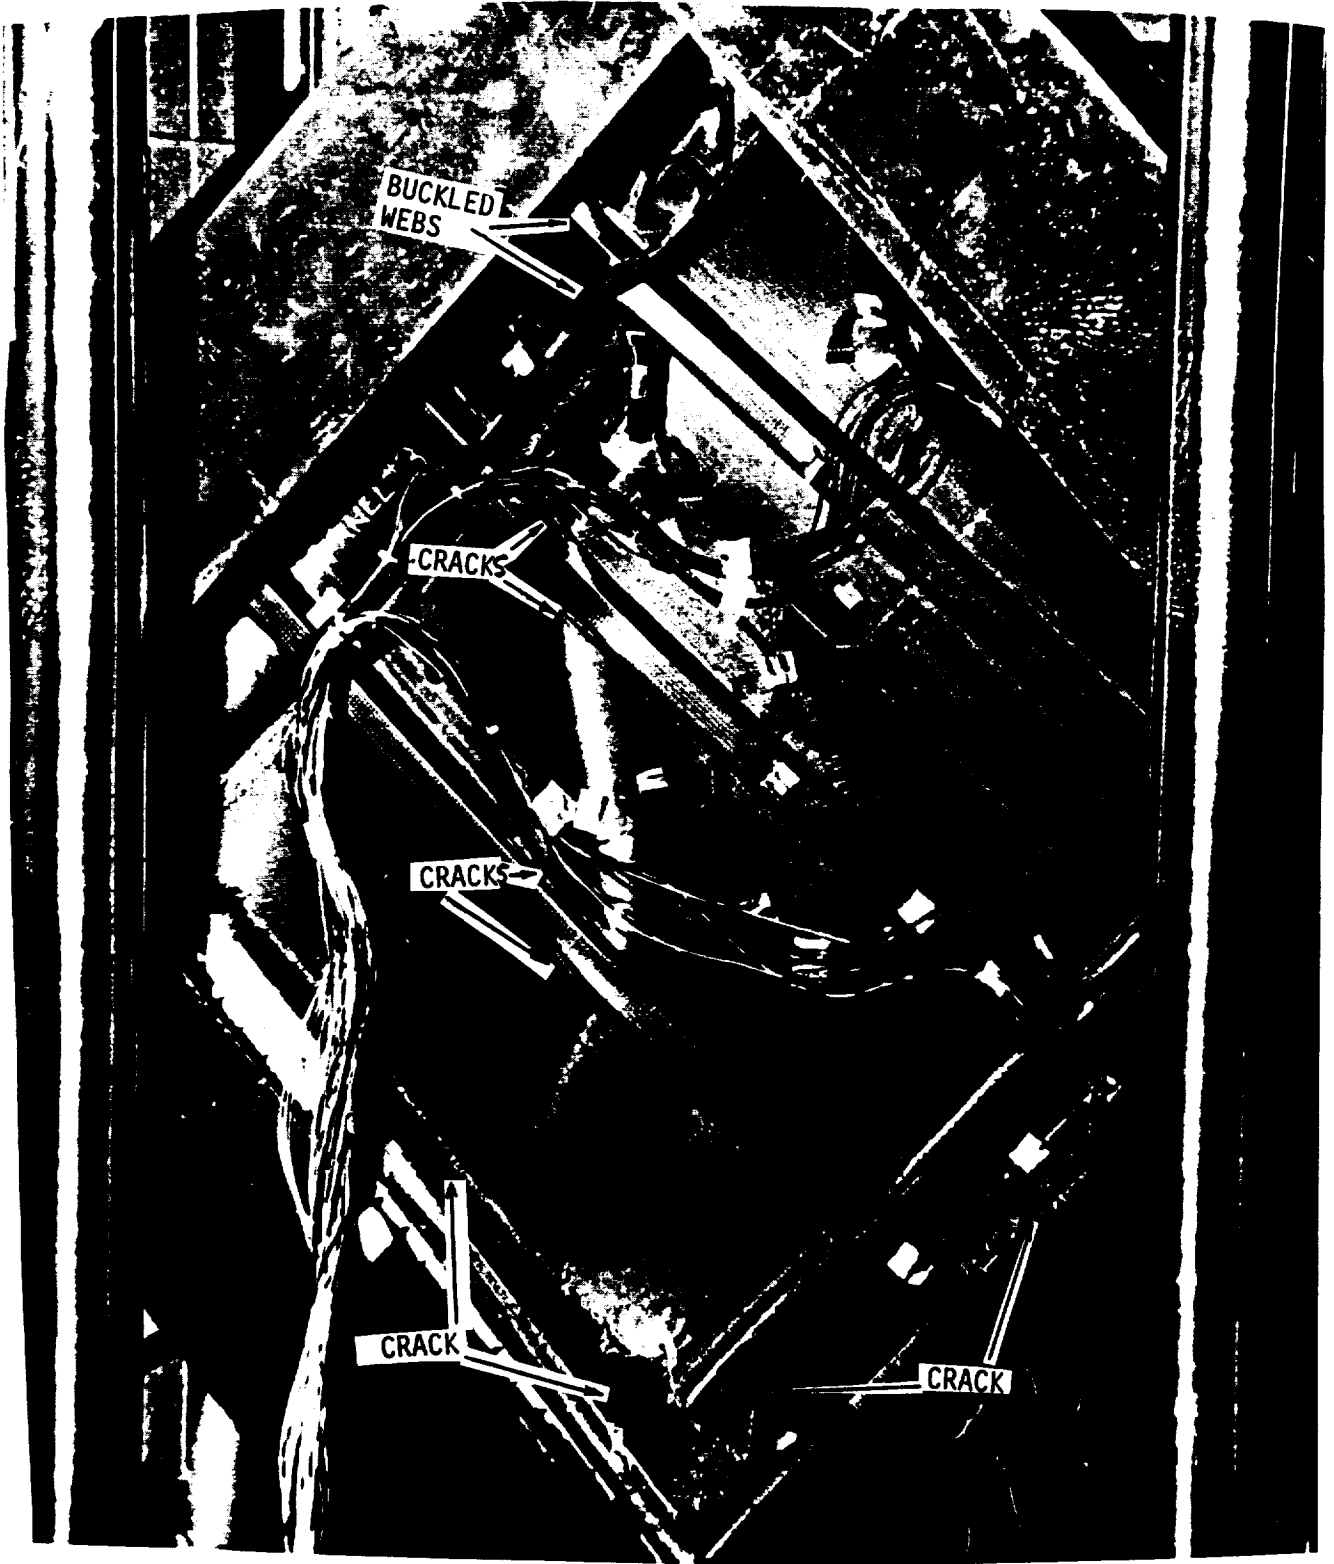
FULL-SCALE TEST NO. 3. FAILURE AT 25925 LBS (622 LBS/IN)
